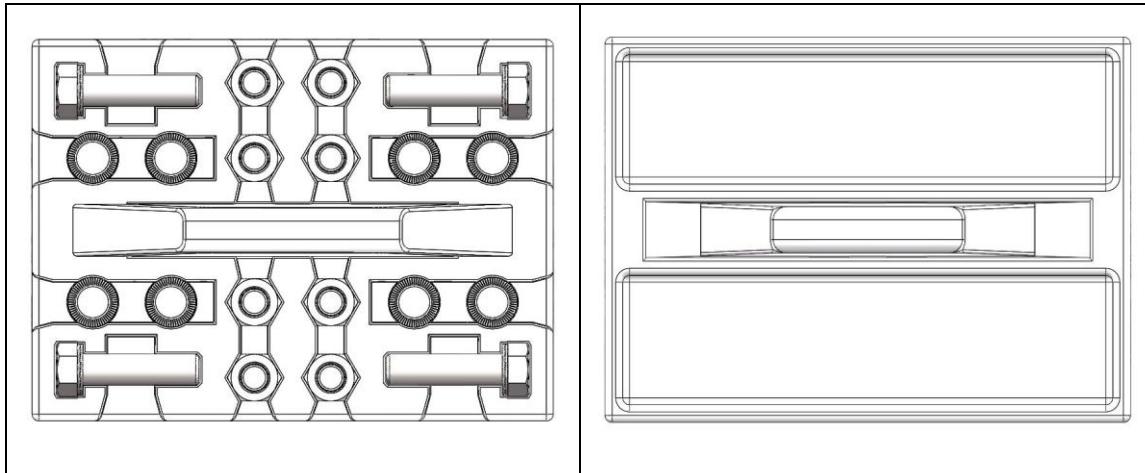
Top view (left) and bottom view (right) of left hand suspension hardware fixture [58].
